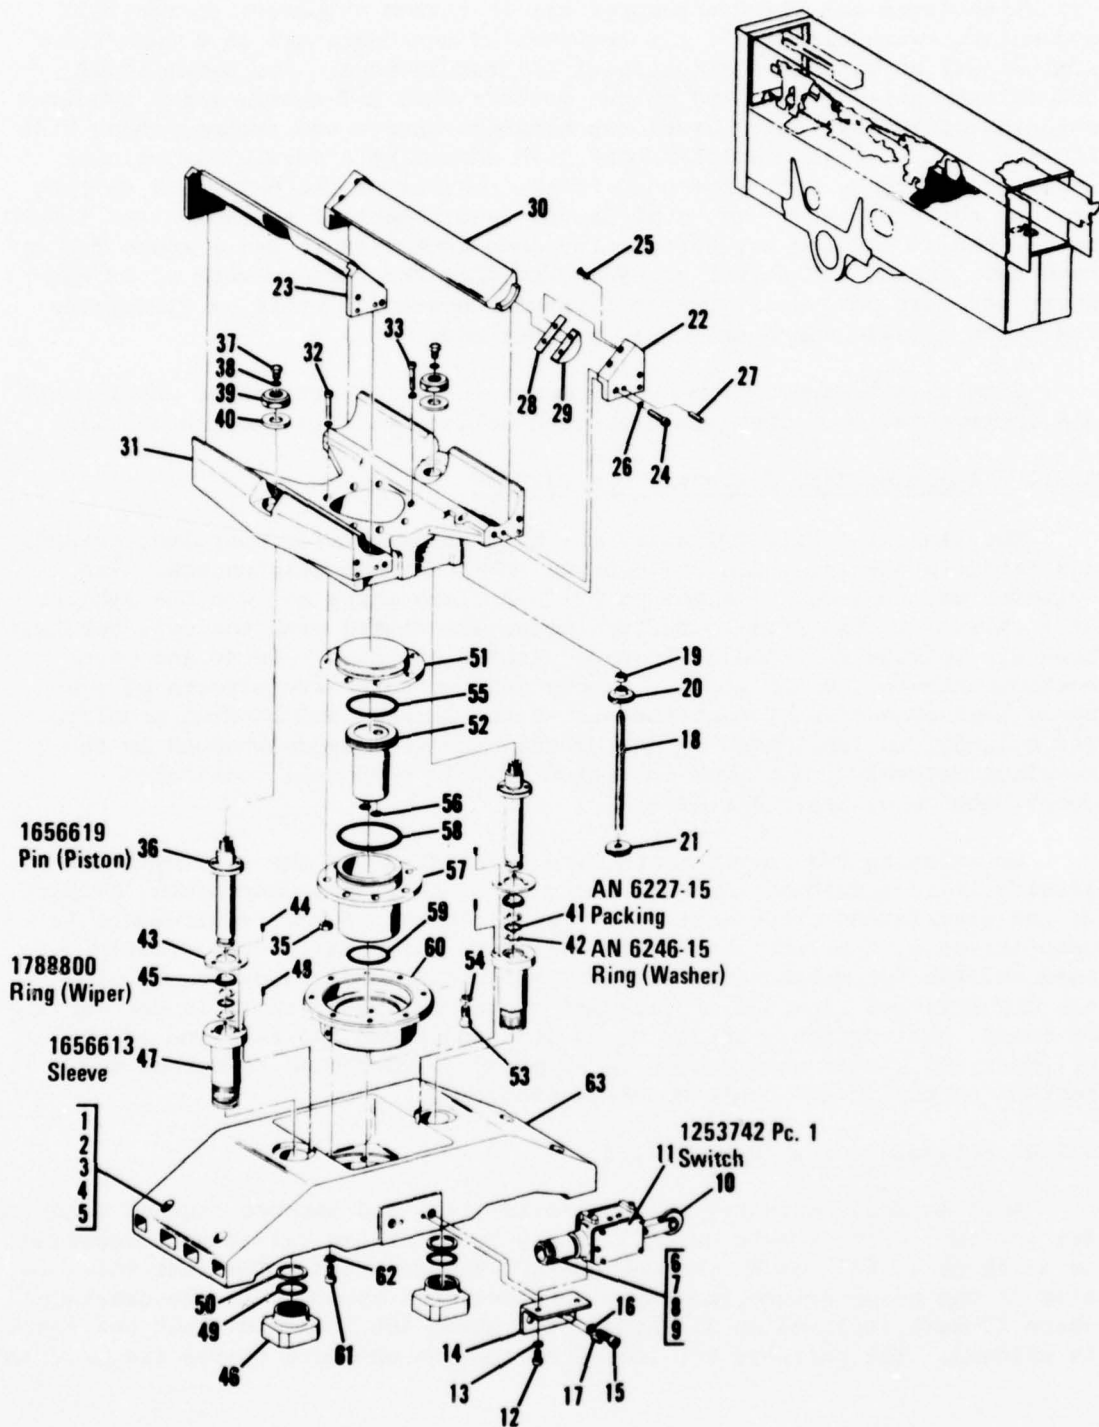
SNUBBER ASSEMBLY, BOTTOM FORWARD, P/N 1807541
